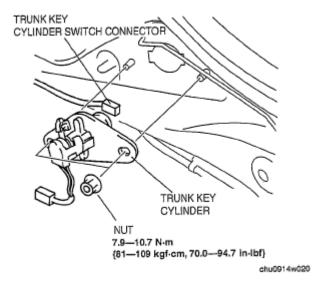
Identifying Trunk Key Cylinder Remove/Install Components With Torque Specifications Courtesy of MAZDA MOTORS CORP.
